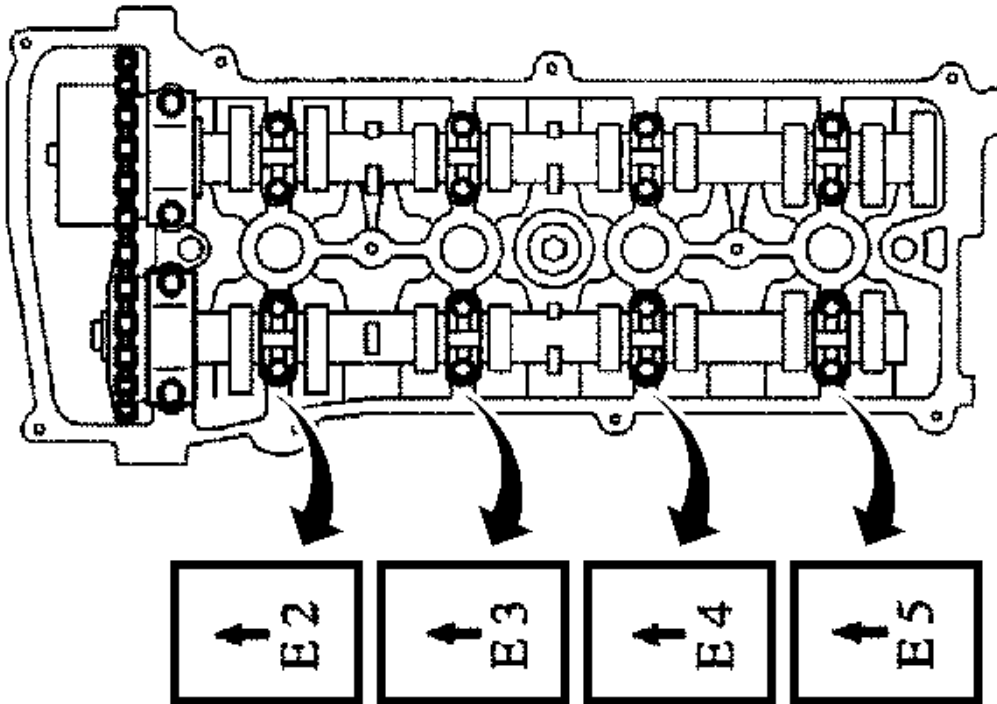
View Of Front Marks & Numbers On Bearing Caps
